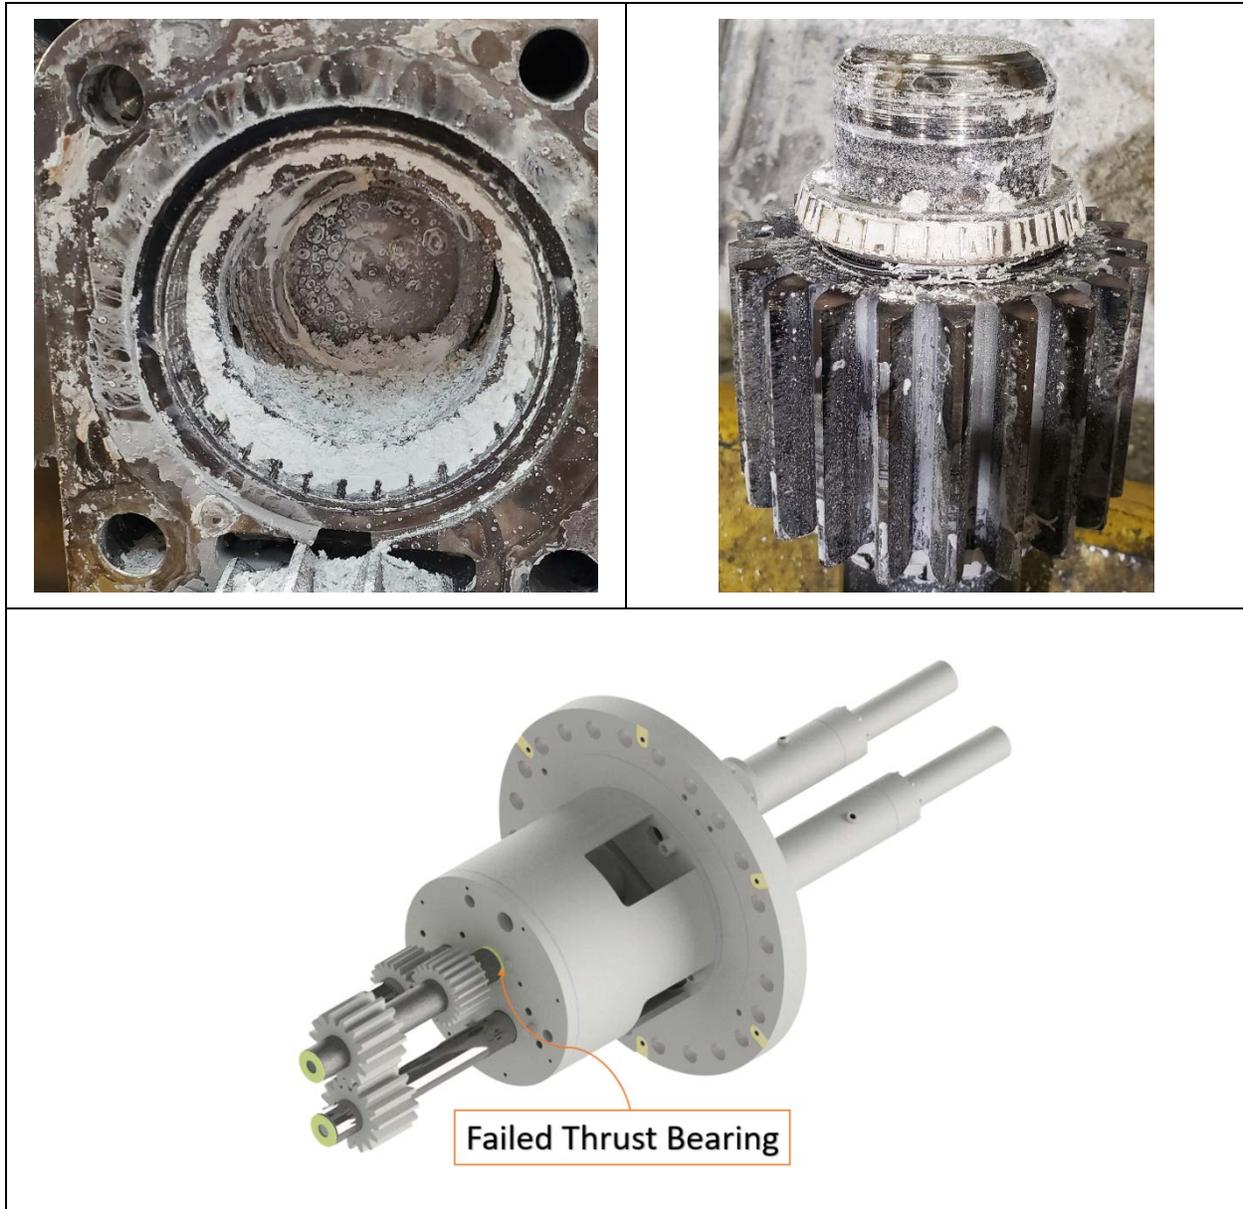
Damaged shaft sleeve following Experimental Campaign #2.
